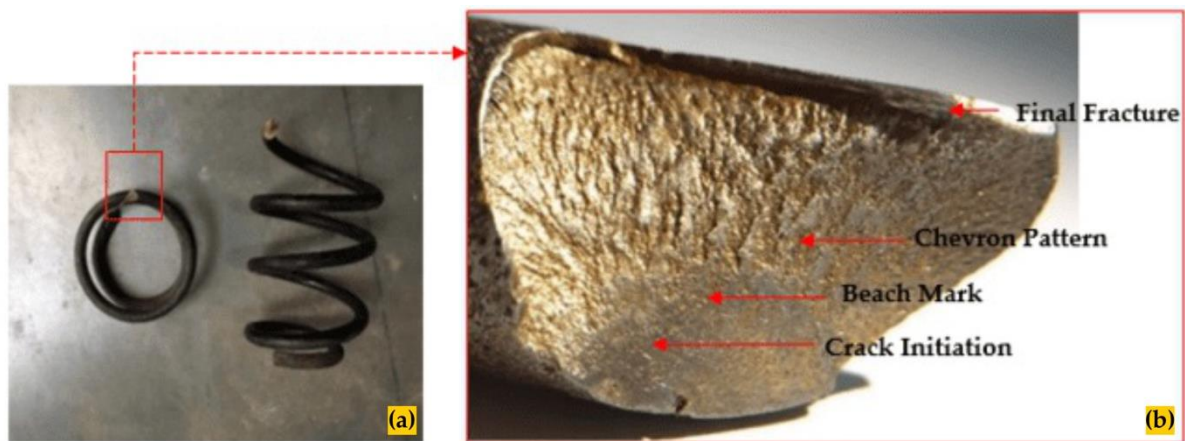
a) Fracture coil spring location, b) Fracture surface
